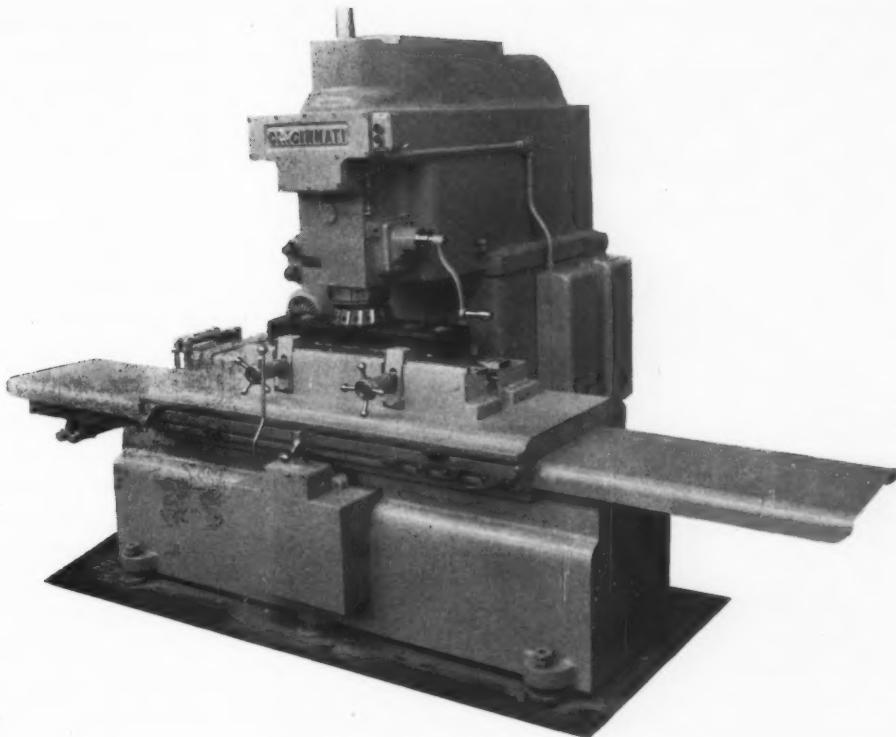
Completed light weight Hydromatic milling machine, bottom view of which is shown in Fig. 8. Spacers, bed, and table are steel
